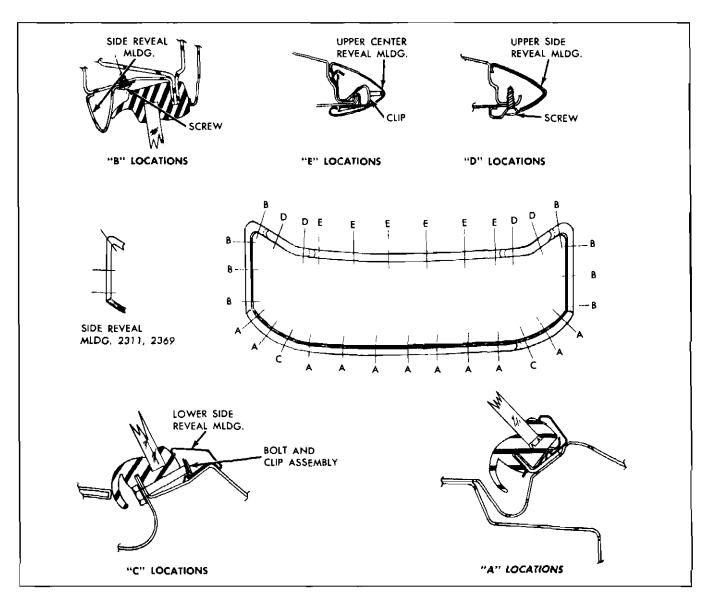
Back Window Reveal Moldings—11, 69 Styles
